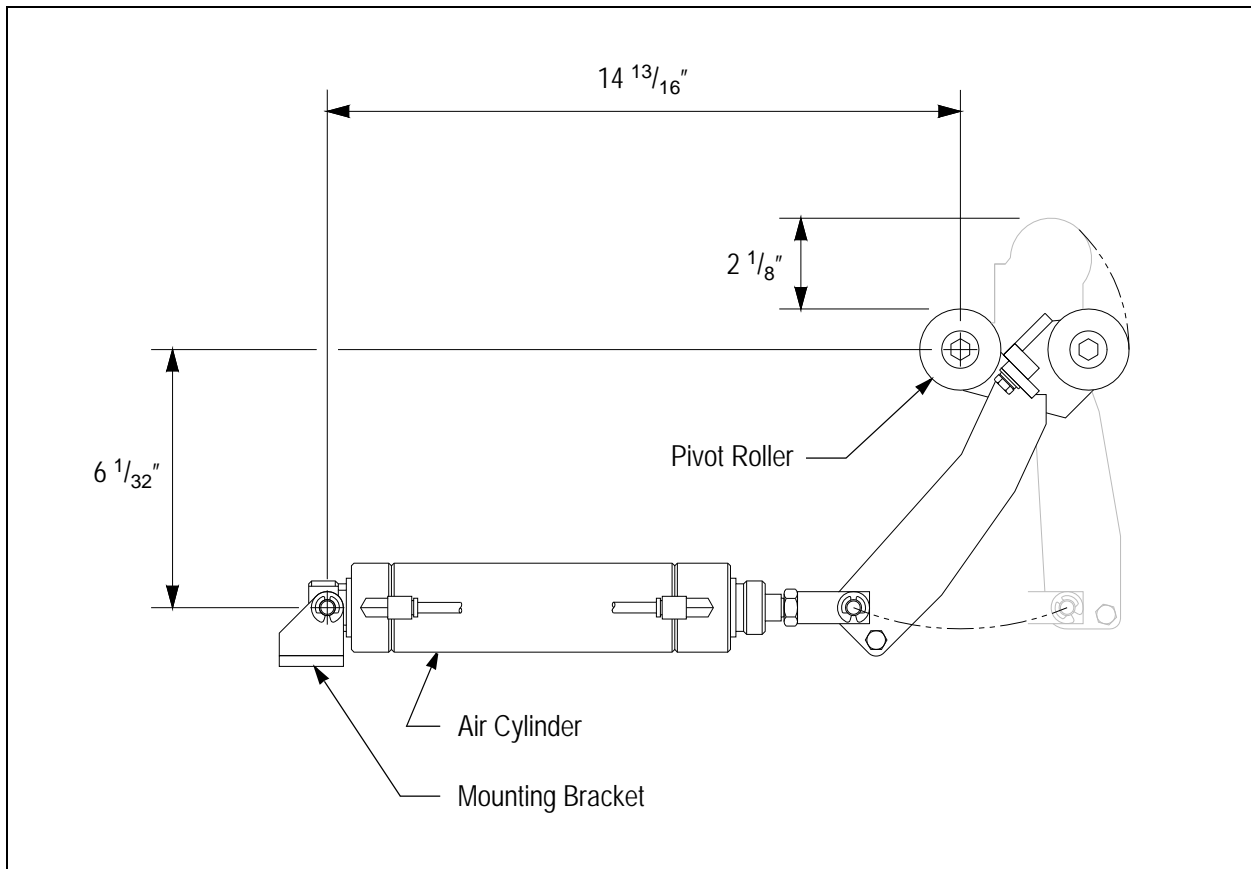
Actuator & Linkage Dimensions – 3" & 6" Roller Centers
